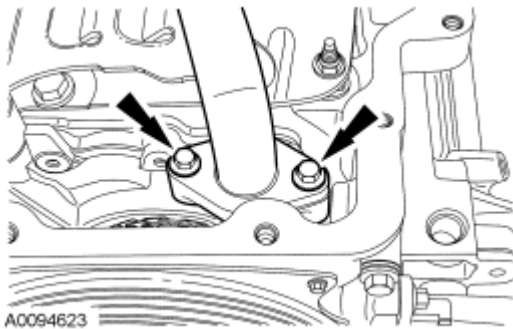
Locating Oil Pump Screen & Pickup Tube Bolts
